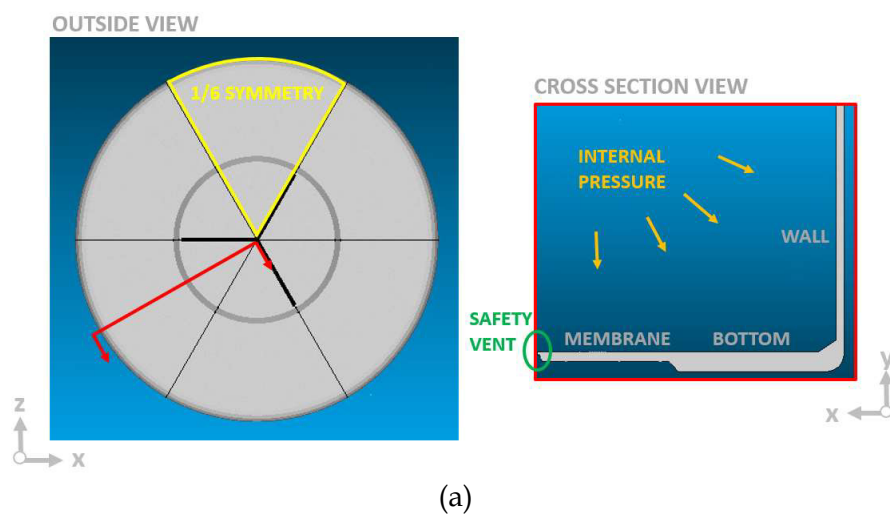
Geometrical details of the analysed structure: outside and cross section views of the thin-walled aluminum component
